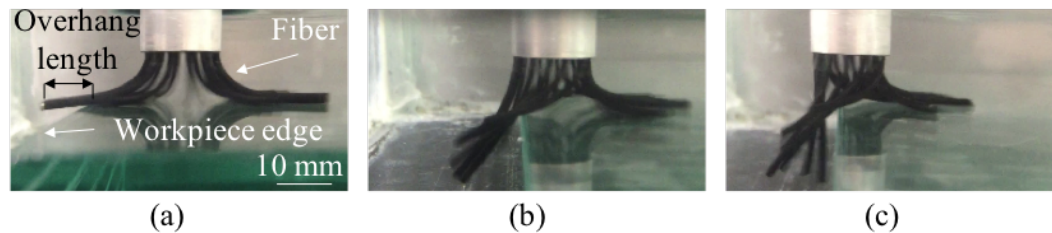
Twelve fiber Nylon 6/6 tool – workpiece edge interaction; (a, b) successful fiber reengagement (c) unsuccessful fiber reengagement
